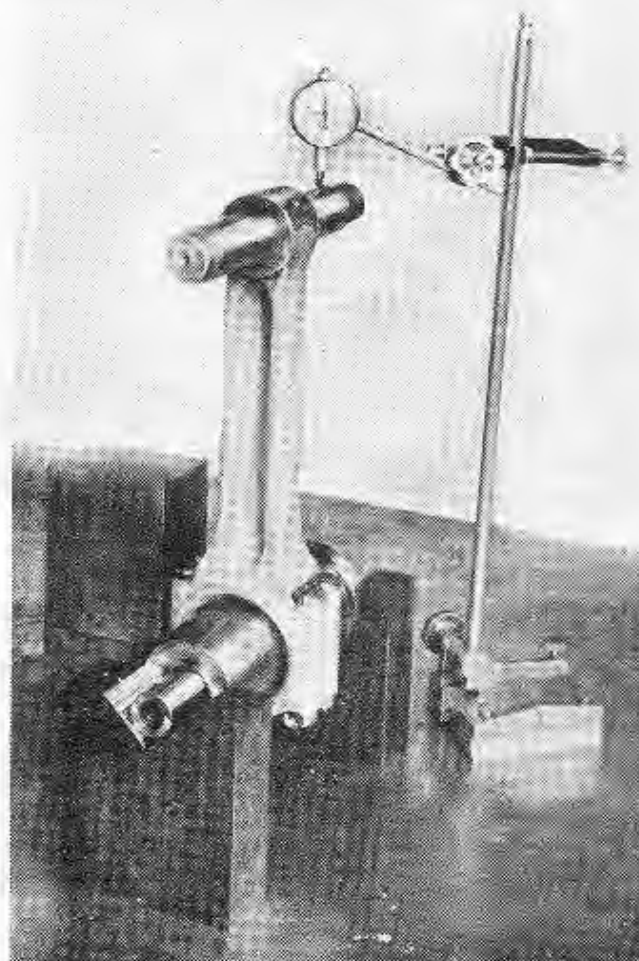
Checking connecting-rod for parallelism and twist on V-blocks
